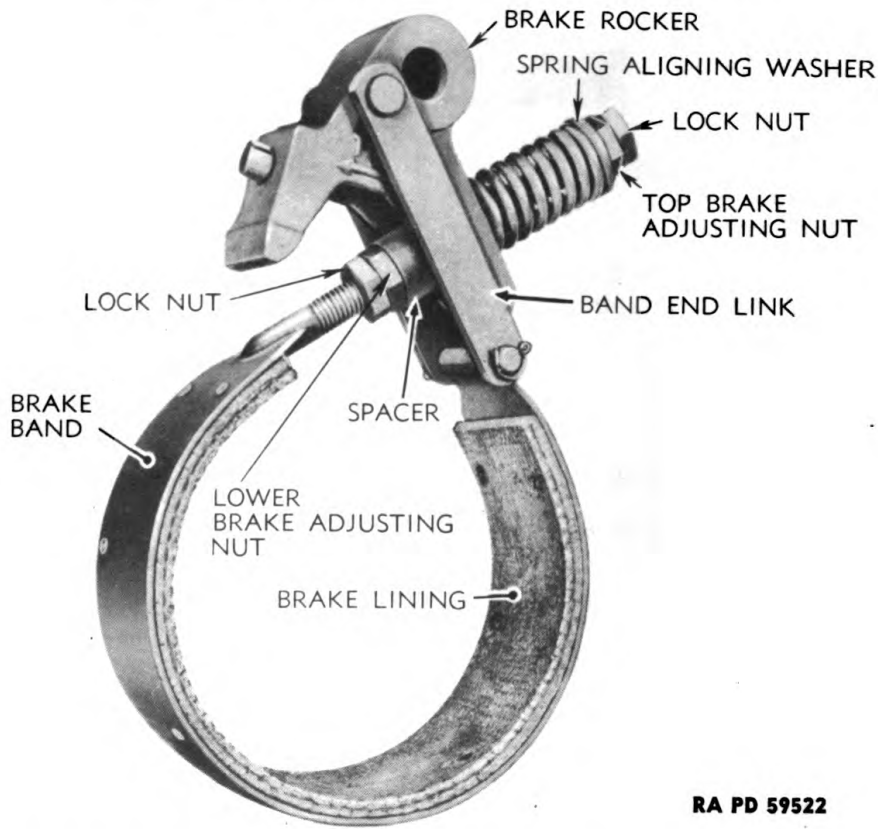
Automatic Winch Worm Safety Brake Assembly
